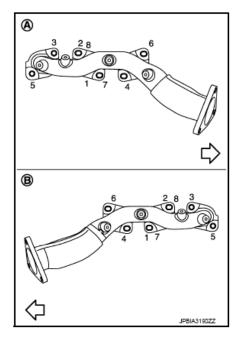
Identifying Tightening Sequence Of Exhaust Manifold Cover Mounting Nuts Courtesy of NISSAN NORTH AMERICA, INC.
